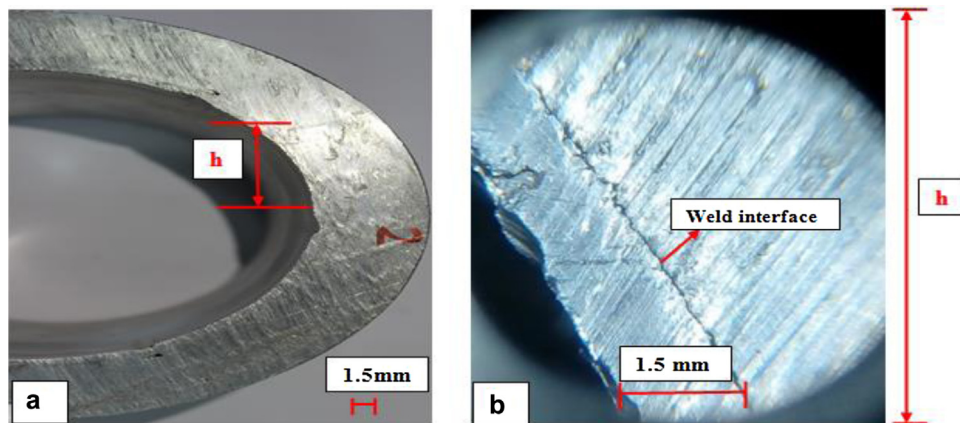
(a) 10 \times microscopic image of the tube-flange weld interface, (b) 60 \times microscopic image showing the tube-flange weld interface.
